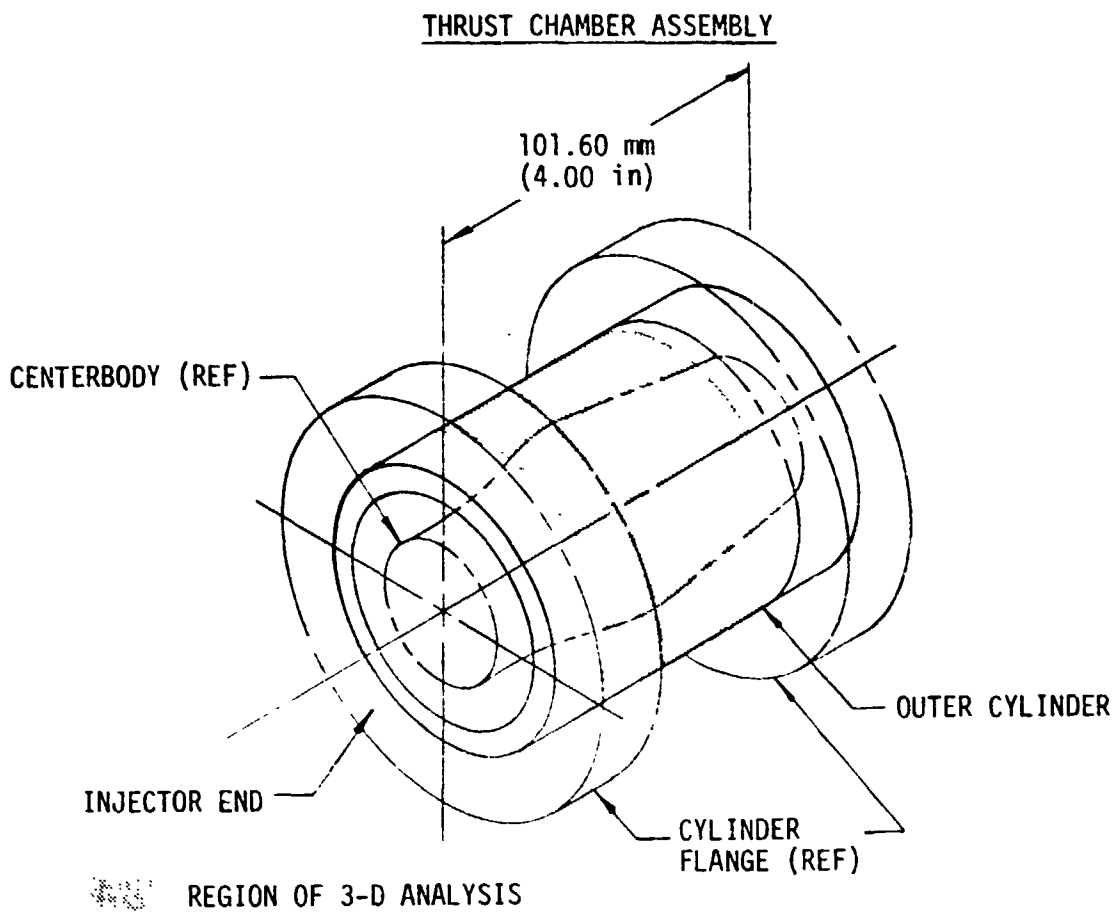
PLUG NOZZLE THRUST CHAMBER GEOMETRY
